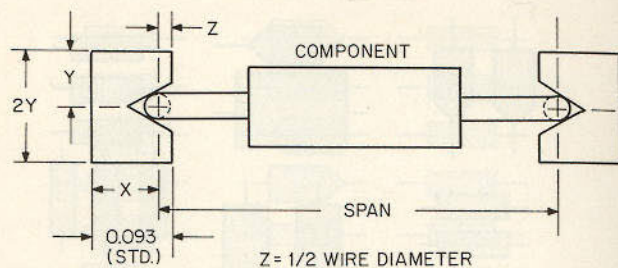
Outside formers. Top view of formal component lead in tooling of insertion head.
